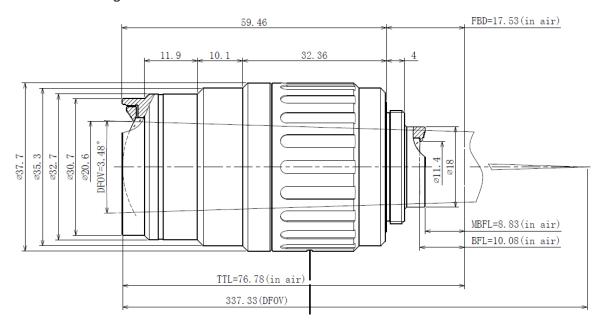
Mechanical drawing of the ELM-75-4.0-8-C-NIR
